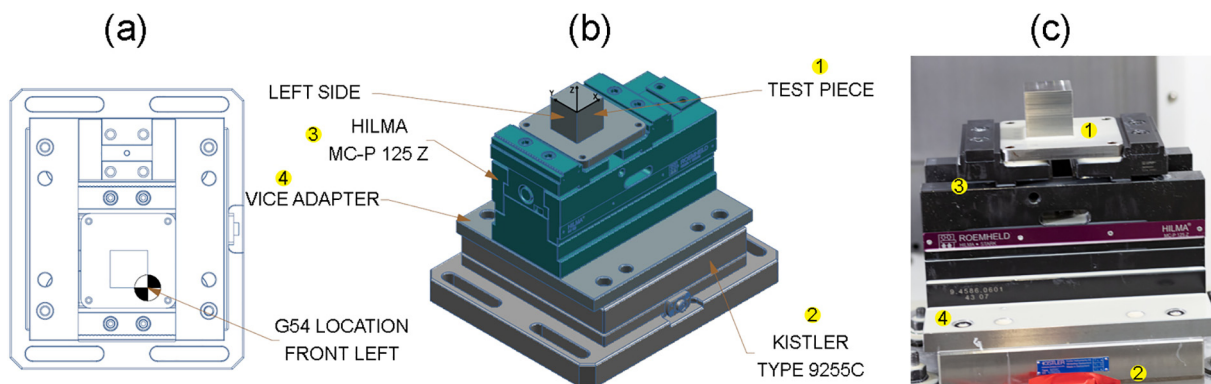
(a) Machine setup with a datum reference. (b, c) Mounted fixture-test piece assembly.
